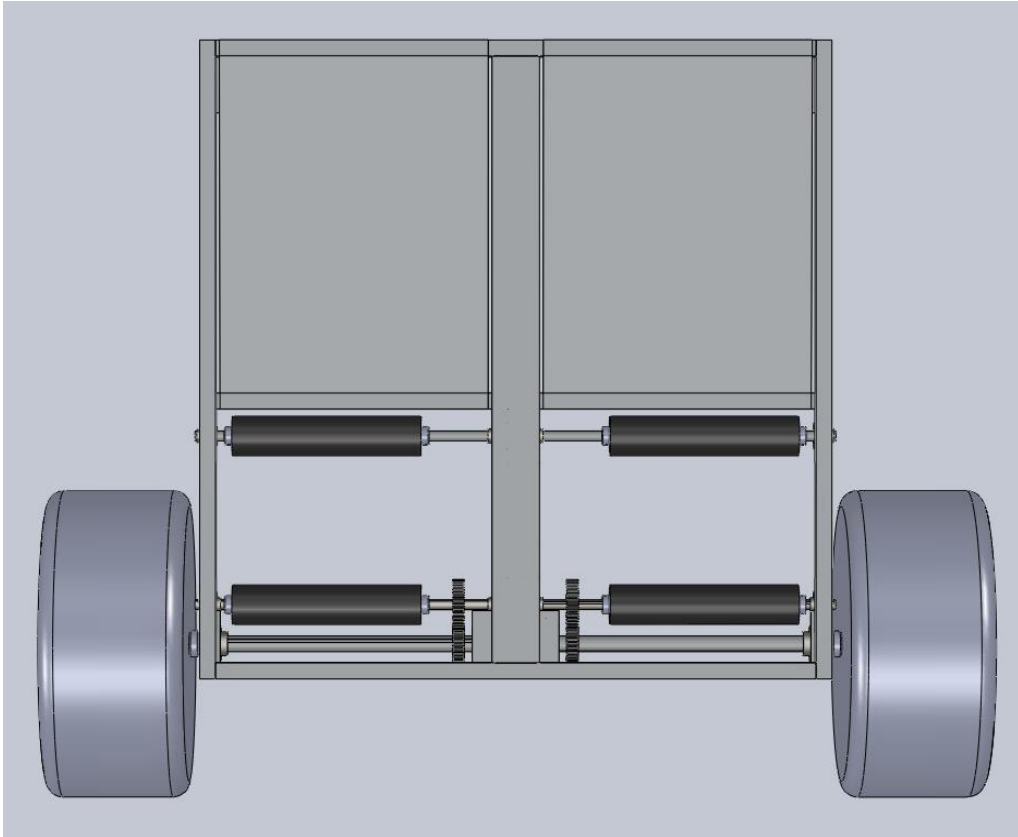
CAD Drawing of the Off-road Manual Wheelchair Platform – Bottom View.
